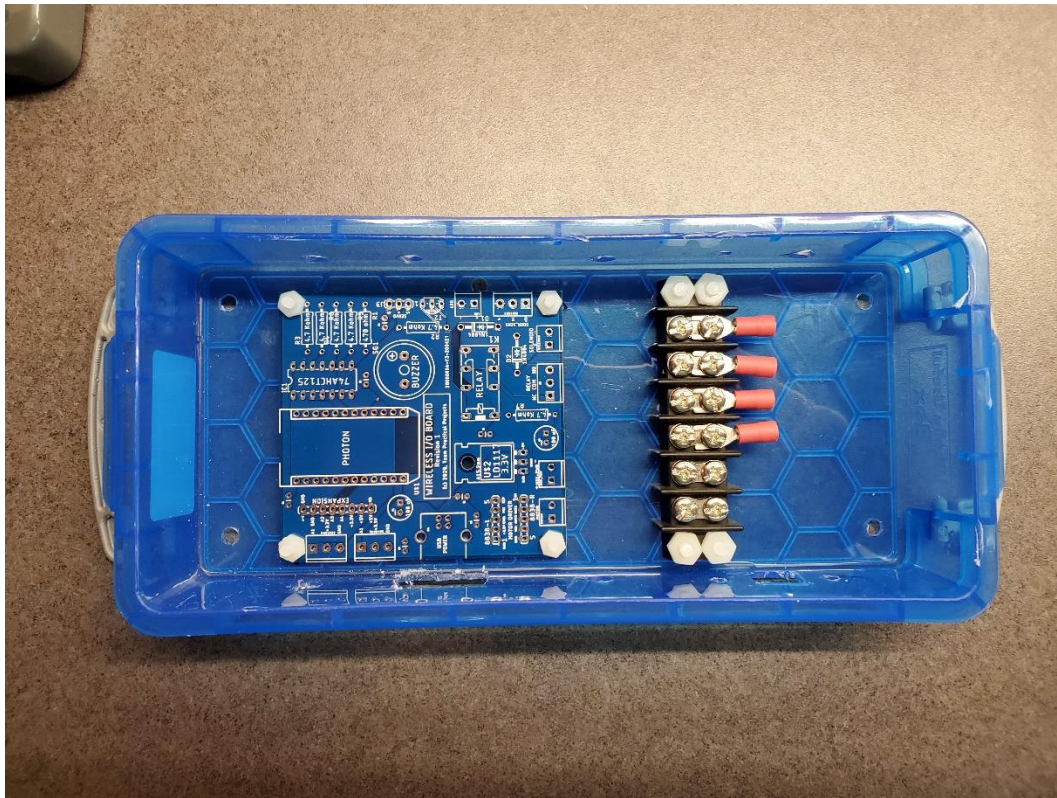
Solenoid Lock PCB and Terminal Block in Enclosure.
